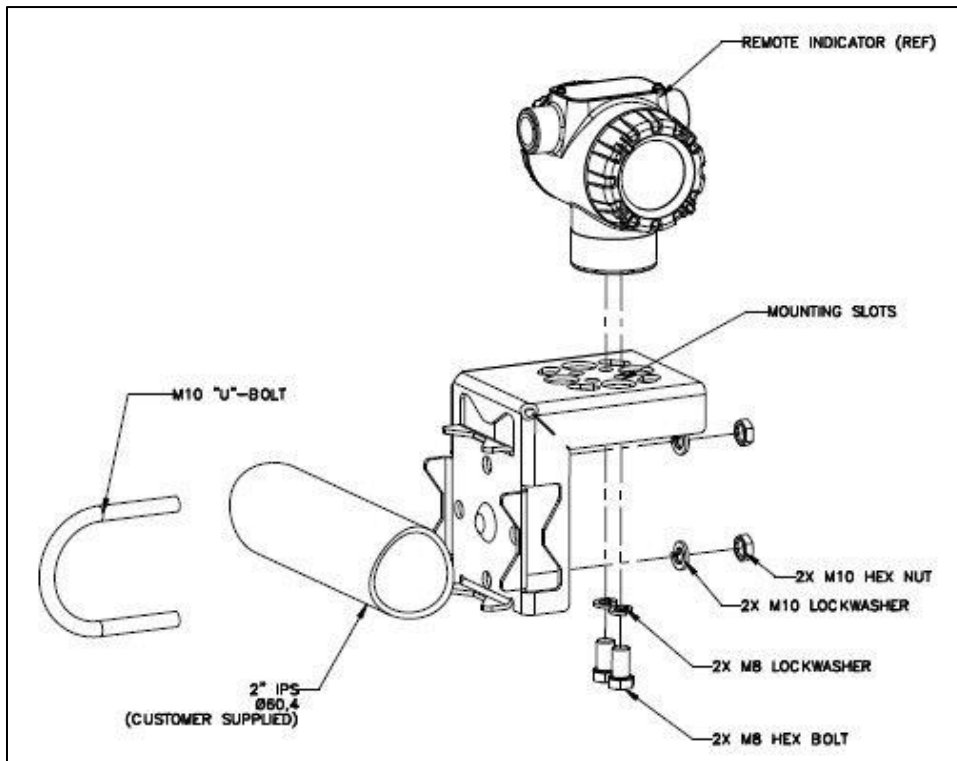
Pipe Mount - Horizontal Mounting Bracket
